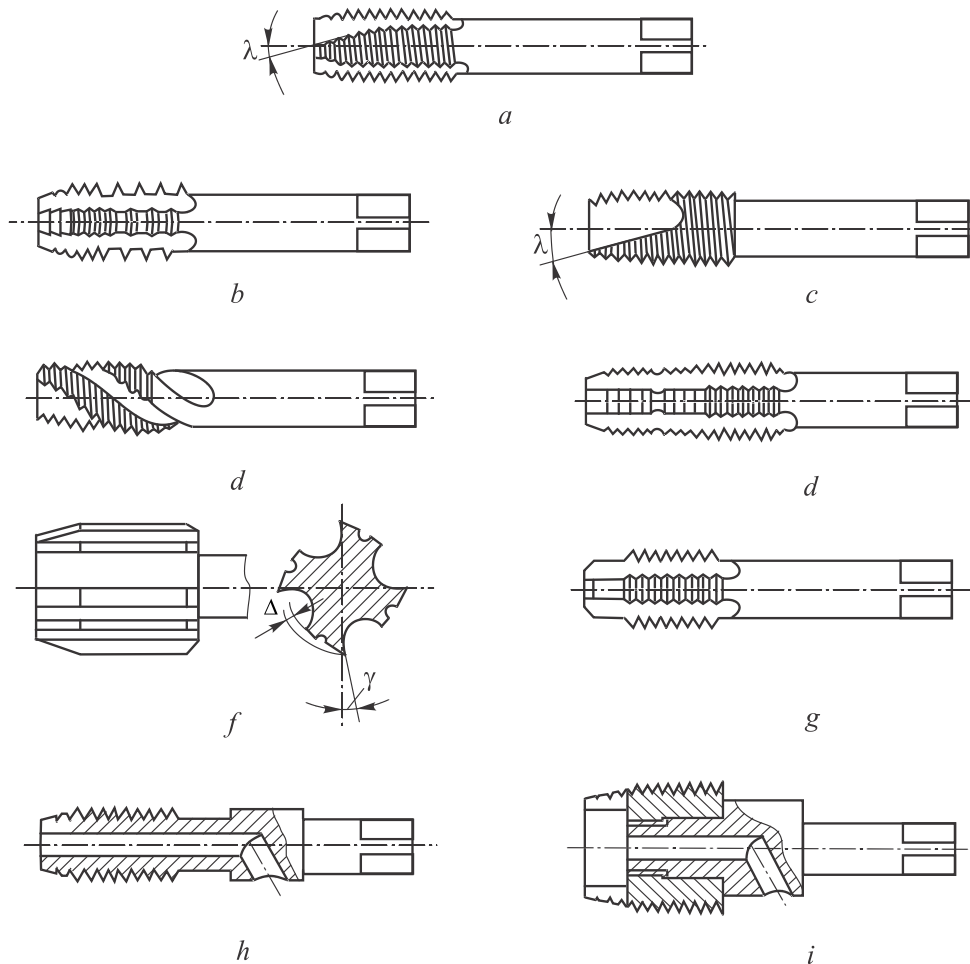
Types of taps: (a) spiral-point; (b) with interrupted thread; (c) short-flute; (d) spiral flute; (e) step tap; (f) tap with burnishing edges; (g) with a pilot; (h) coolant fed; (i) bell-type tap
